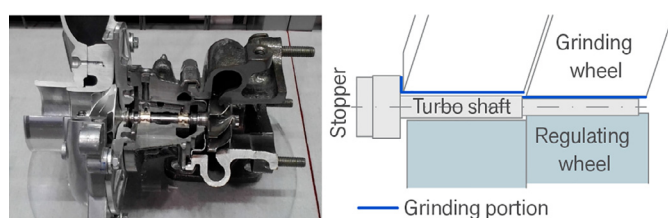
Multi-surface simultaneous angular-centerless grinding for turbo-shaft production (Tohshin Seiki/Tohshin Technical, Japan).
